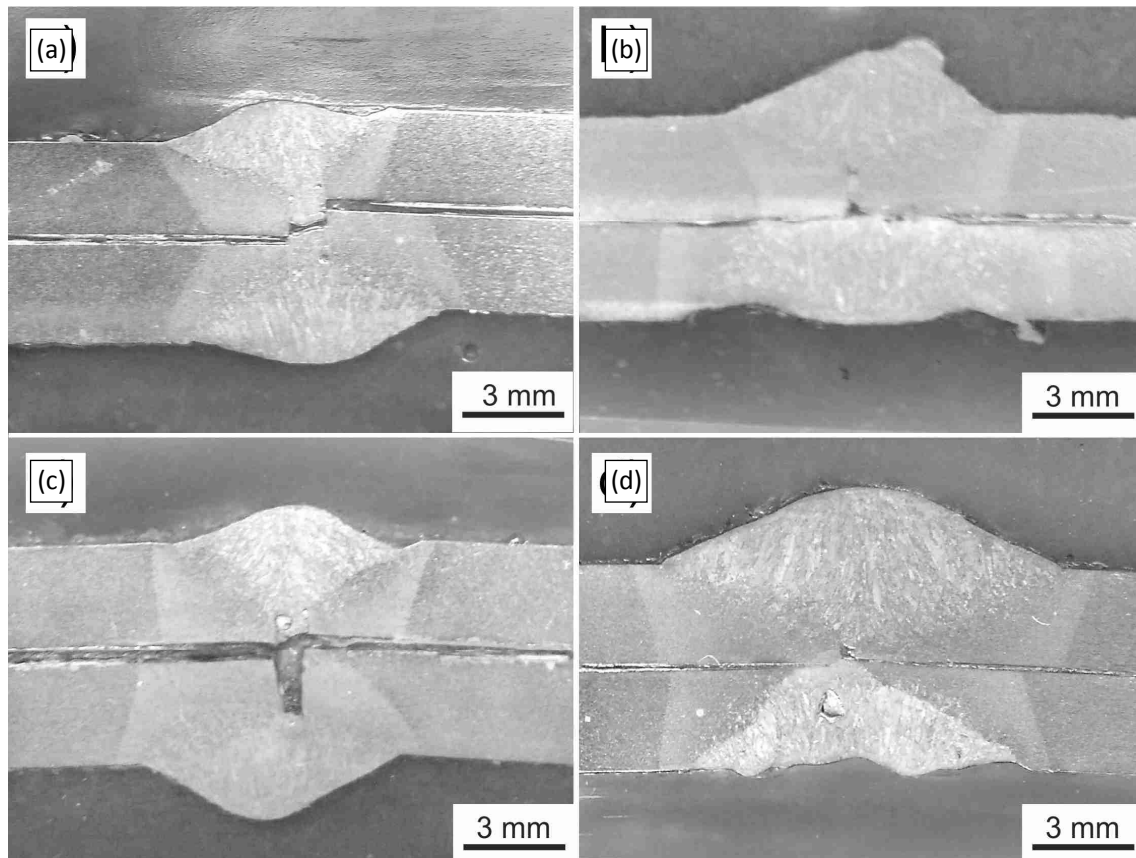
Specimens welded with M21 shielding gas: (a) specimen 5, (b) specimen 6, (c) specimen 7 and (d) specimen 8
